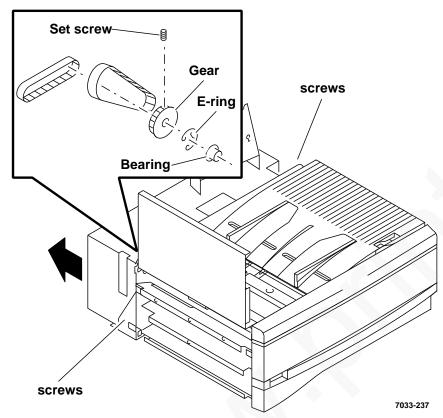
Input drive roller rear pulley, belts, and bearing removal
